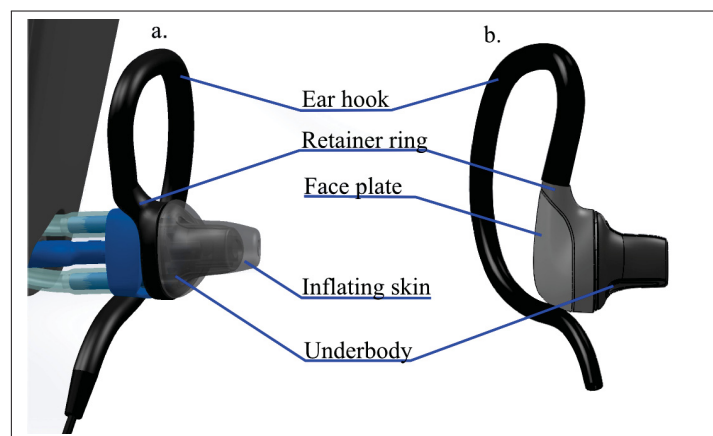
Parts composing the Sonomax V4 earpiece: a) ready for custom moulding;
